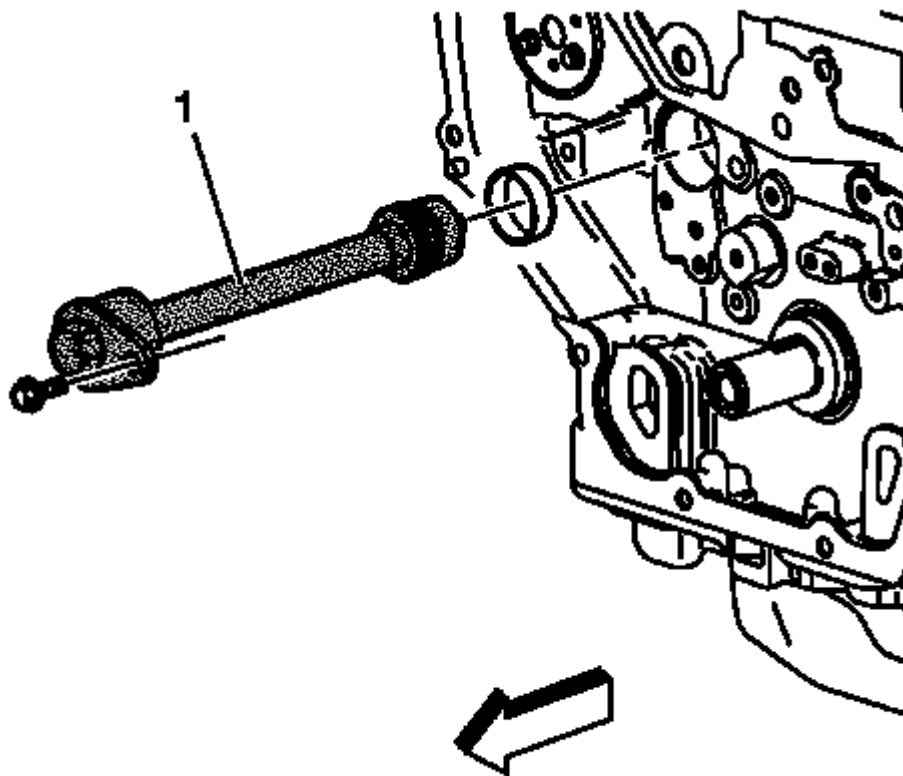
View of Balance Shaft Bushing and EN-43650 Installer
